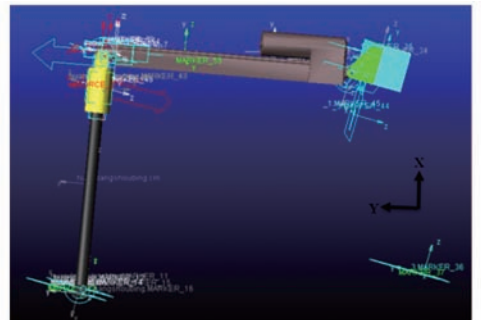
Virtual proto type of tractor driver robot's gear shift mechanical arm
